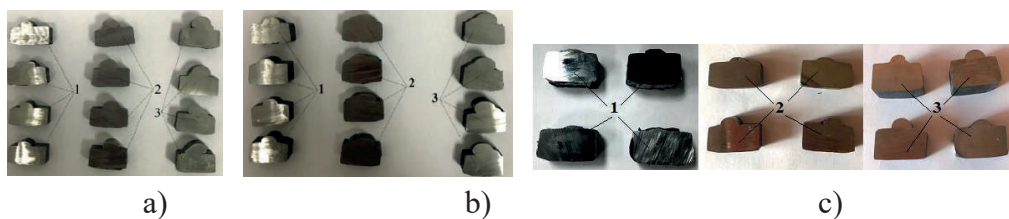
Samples after cutting: a - STOODY M7-G; b - STOODY 102-G; c - TUBRODUR 58 O / G M; 1 - single-layer surfacing; 2- two-layer surfacing; 3- three-layer surfacing
